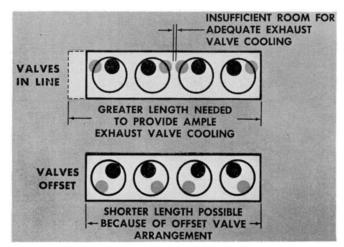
Determining basic dimensions of engine from valve arrangement
